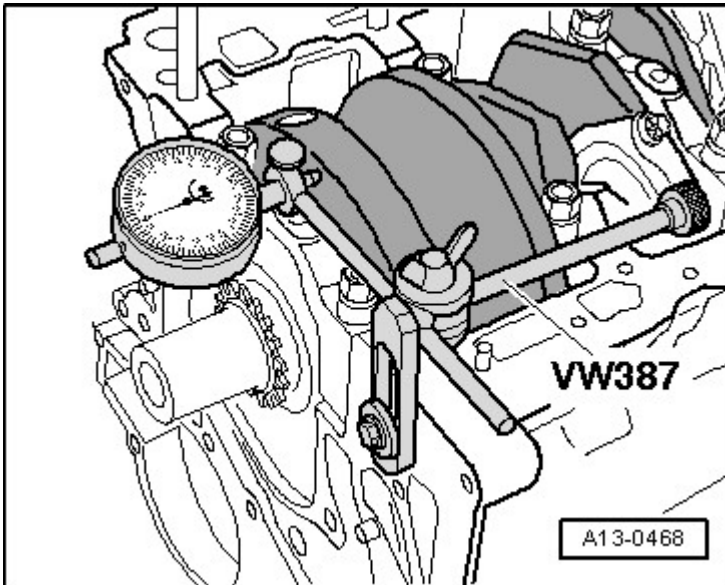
Identifying Dial Indicator Attached Together With VW387 Dial Gauge Holder To Cylinder Block
